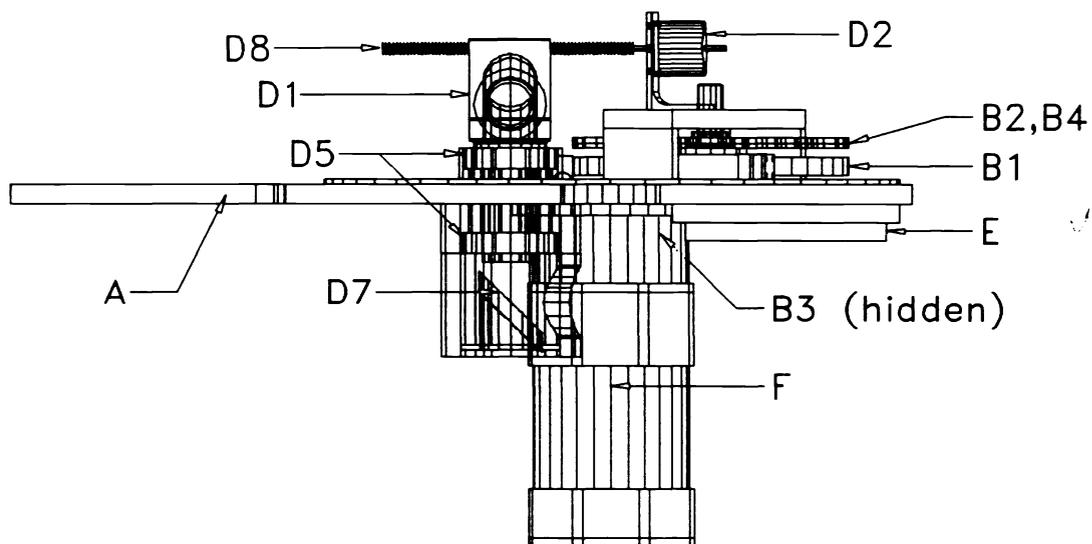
Side view of the f/9 instrument assembly, with the top dust cover removed.
